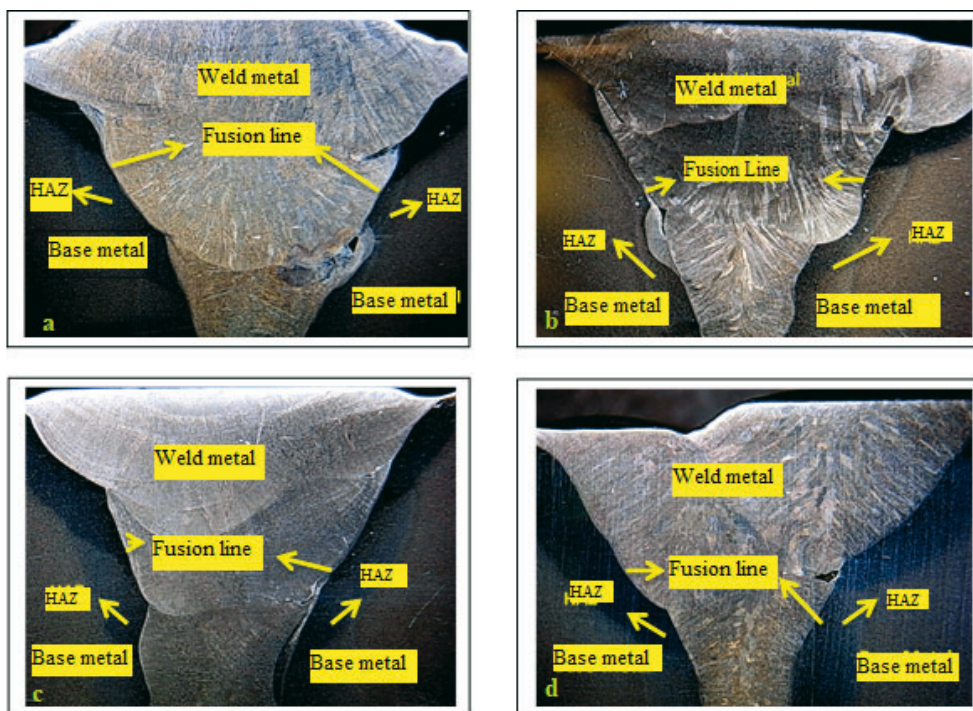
Macrograph (10 mm) of the heat affected zone (HAZ) (a) CC-GMAW, (b) PC-GMAW, (c) DPC-GMAW, (d) CMT-GMAW
